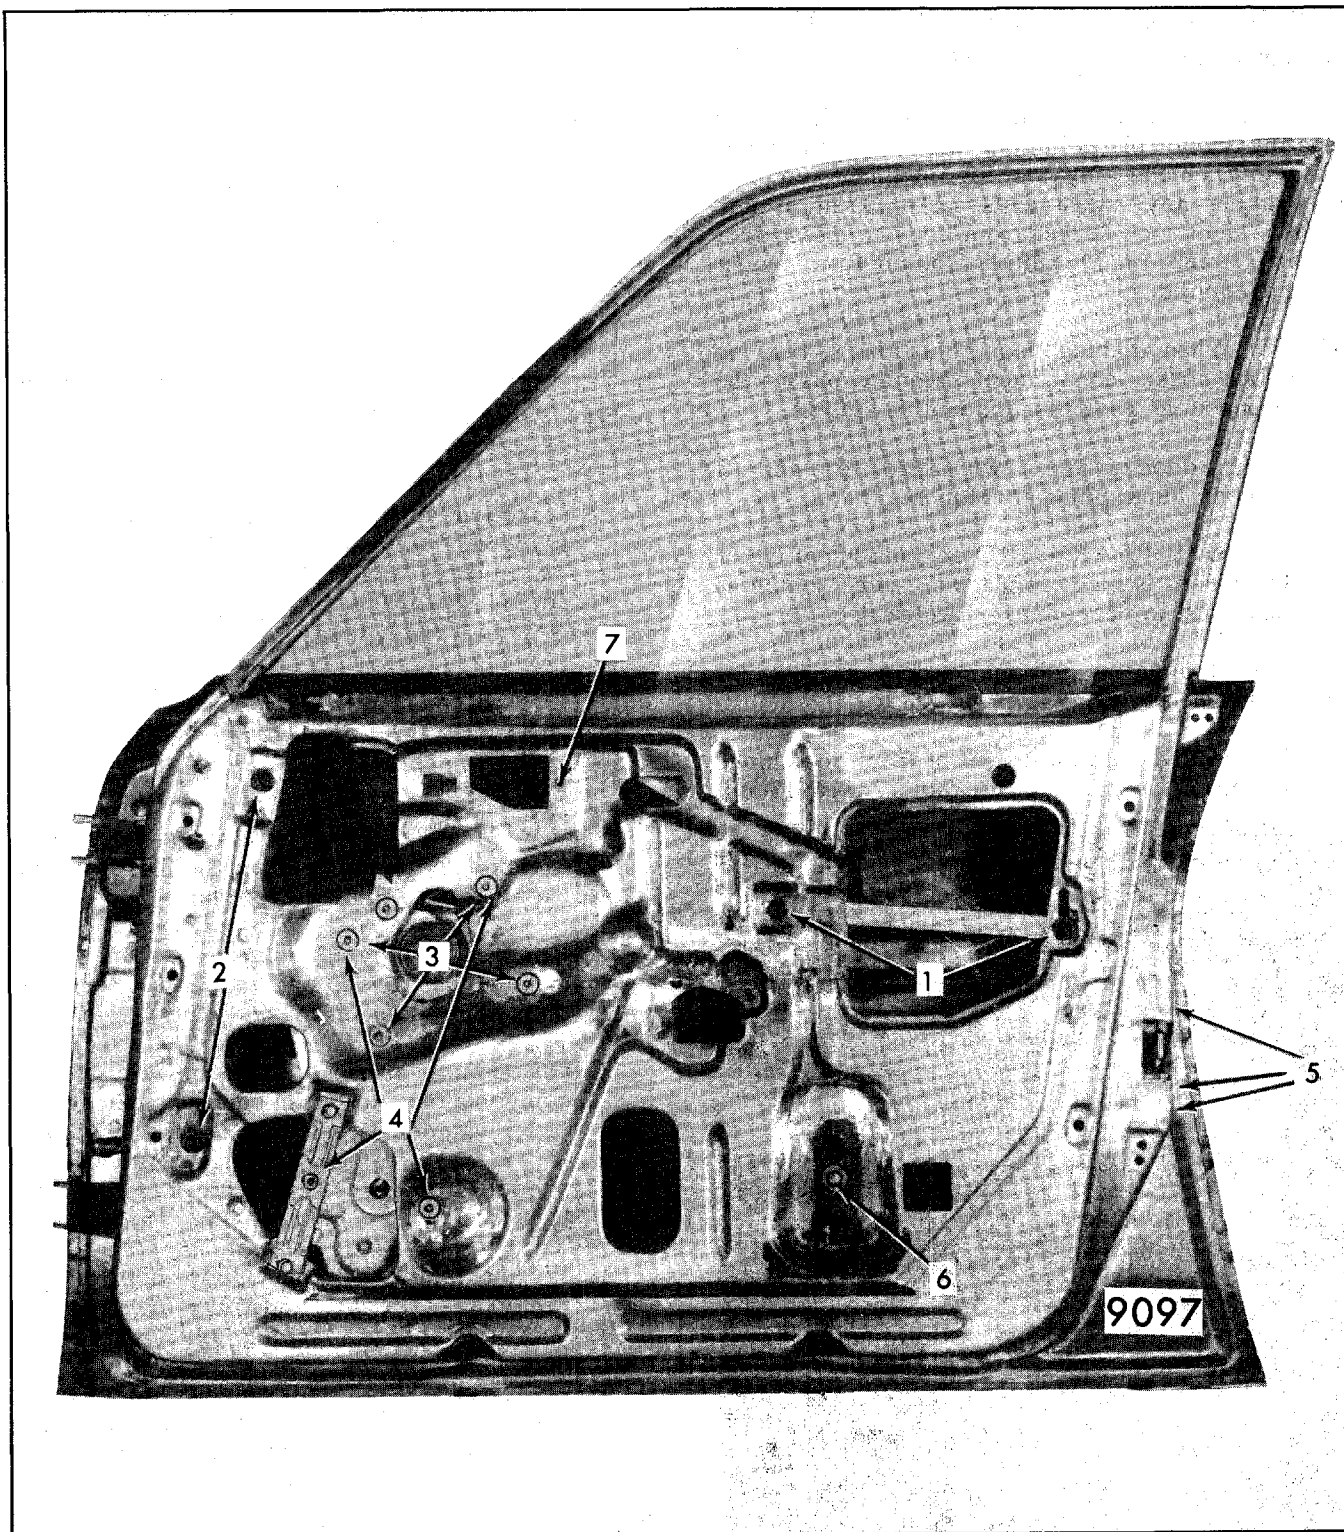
Front Door Hardware Attachments - "X" Styles
